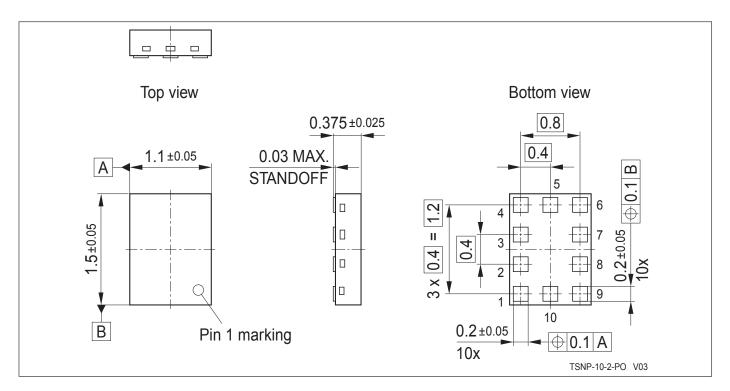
Package Dimensions Drawing (TSNP-10-2)
